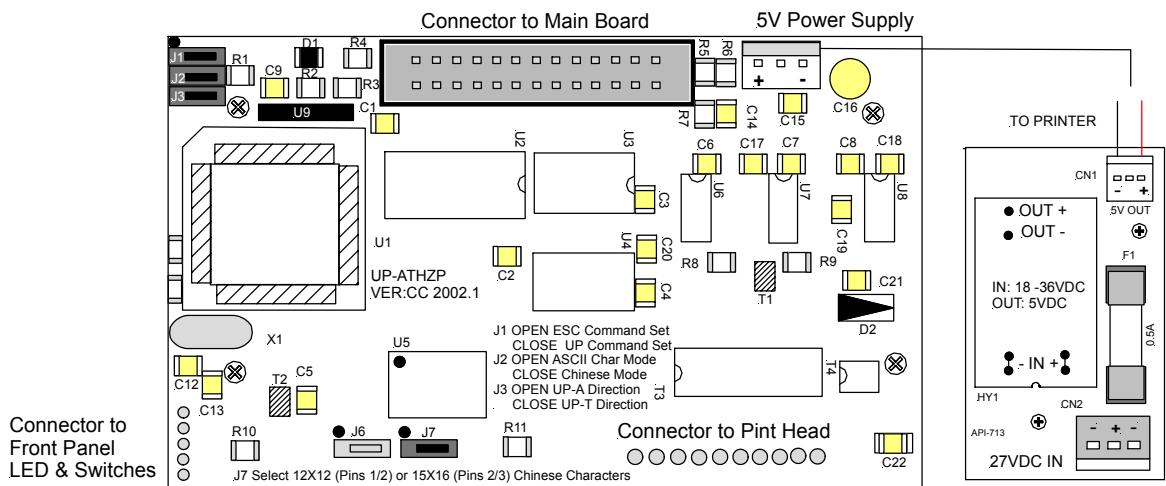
Printer PCB Layout and 5volt Power Supply Board
